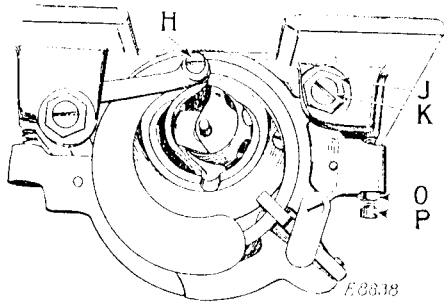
ADJUSTMENT FOR RAISING AND LOWERING THE FEED WHEEL.
